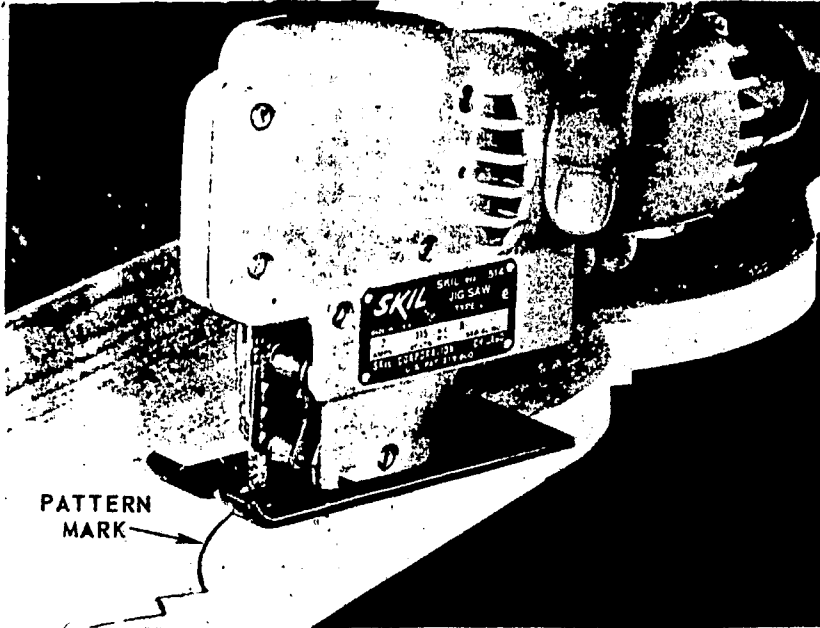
Sawing curved cuts with a portable jig saw (saber saw). (Skil Corp.)
